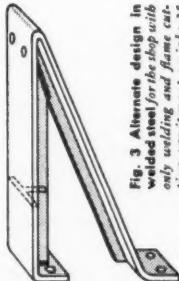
Alternate design in welded steel for the shop cutting equipment weighs 35 pounds... costs only \$64.70... a saving of 46% over Figure 1.
